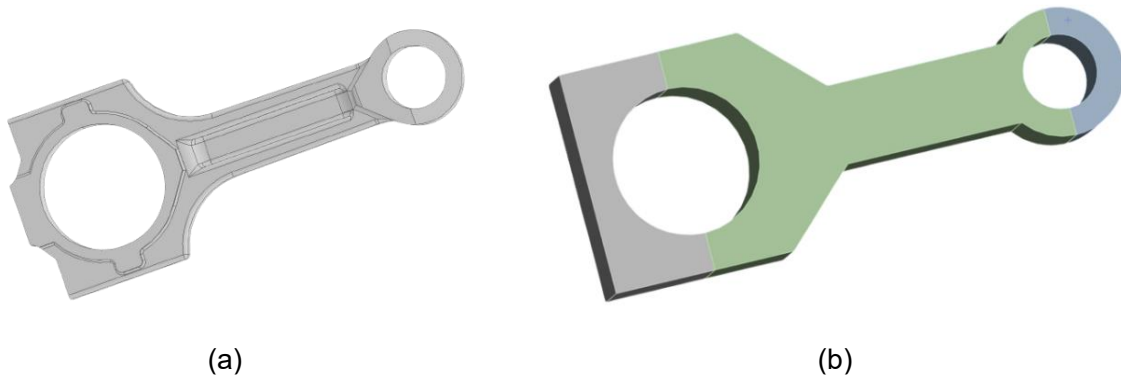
(a) CAD Model (As-is); (b) Oversized CAD Model used for the TO analysis.
